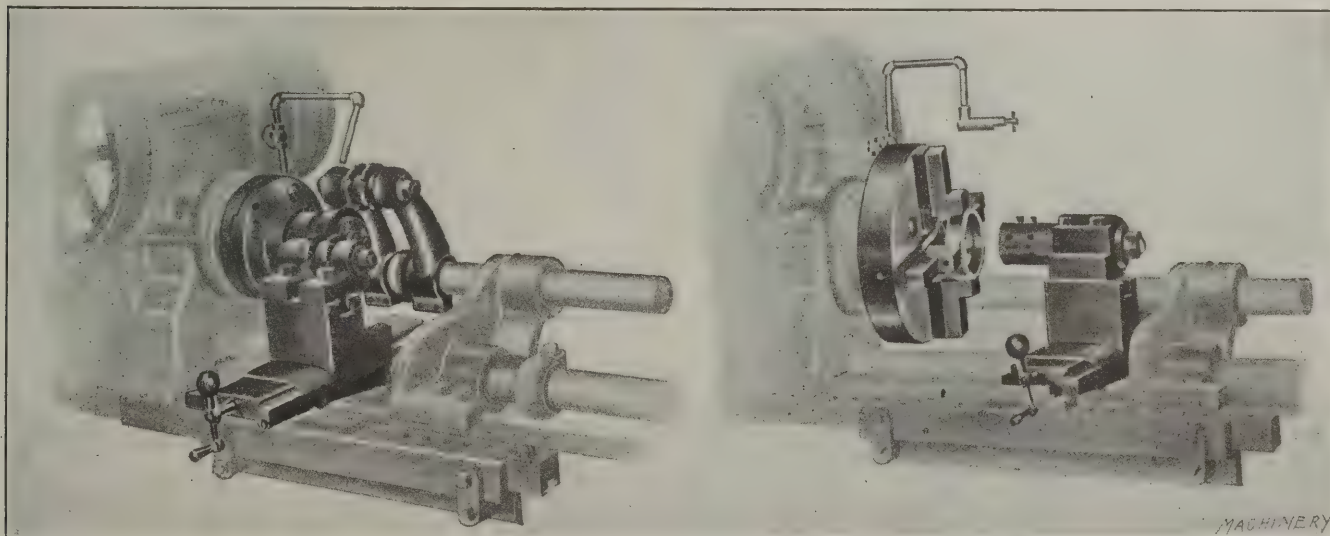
Fay Automatic Lathe used for forming Blanks for Races
